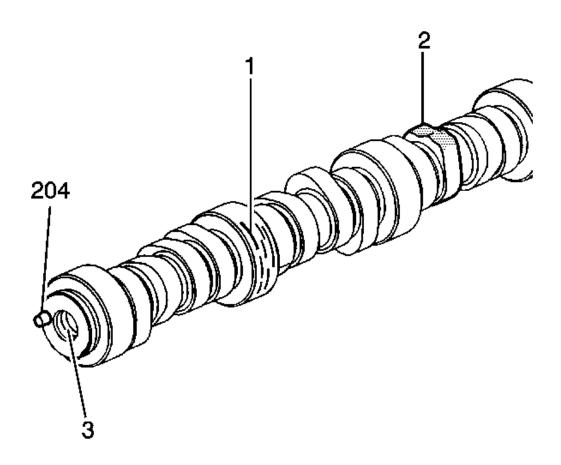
Identifying Camshaft Inspection Areas Courtesy of GENERAL MOTORS CORP.
